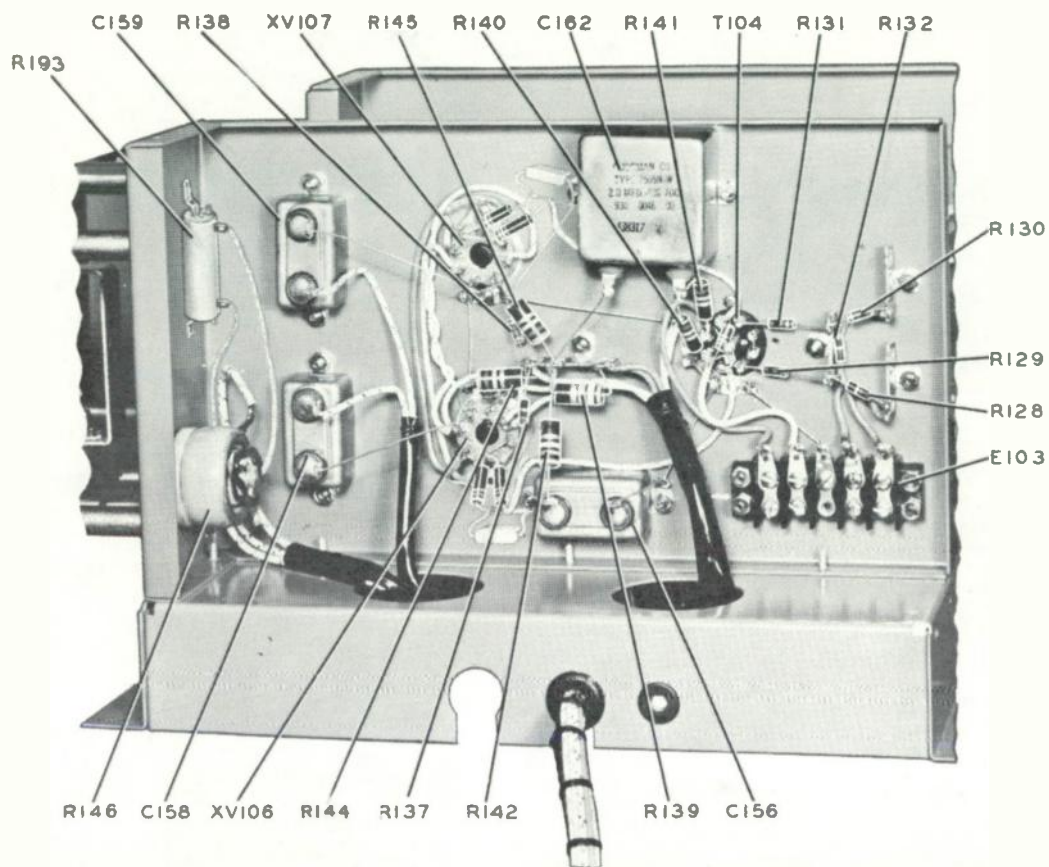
Driver Cabinet Audio Chassis, Bottom View
